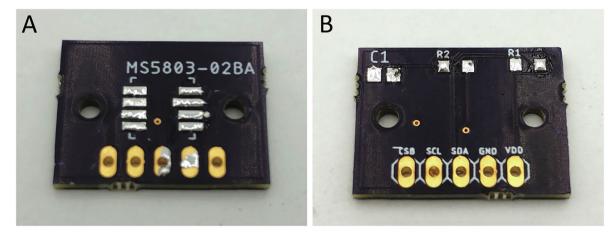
The PCB with a small layer of solder on the pads that will have SMD components. A) Front side: sensor pads. B) Back side: capacitor (C1) and resistor (R1, R2) pads.
